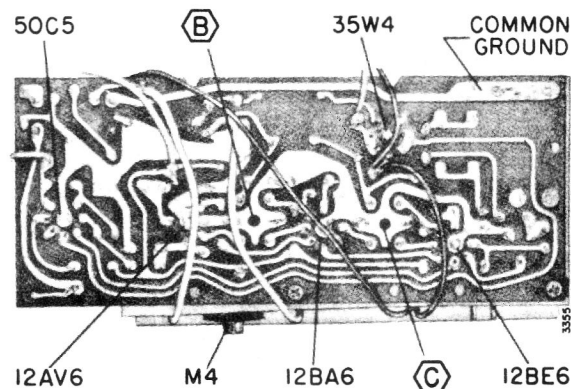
Bottom View of 5D4X Chassis Showing Alignment Points and Tube Locations. 5B4X chassis has same location for tubes and alignment points. Common ground is also the same.
